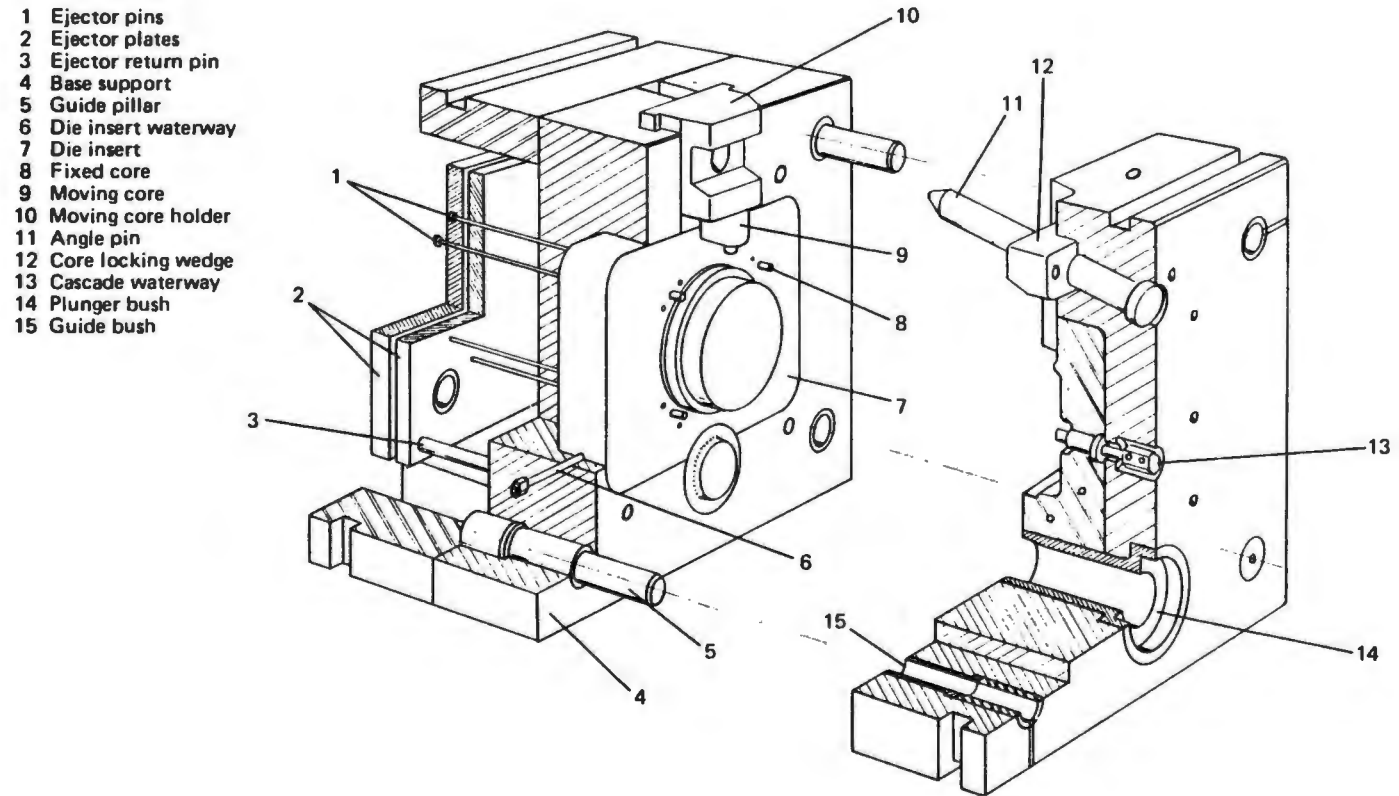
Typical Die Assembly (Reprinted from [16])
